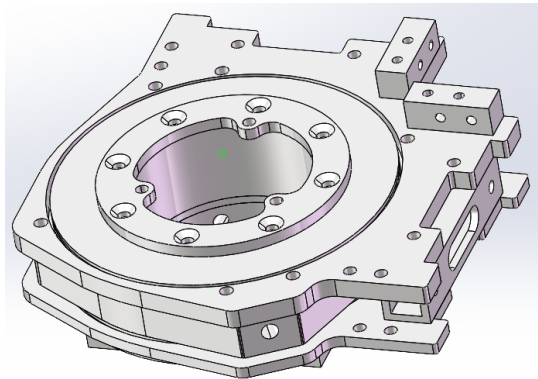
Bearing assemble between wheel and steering motor.
